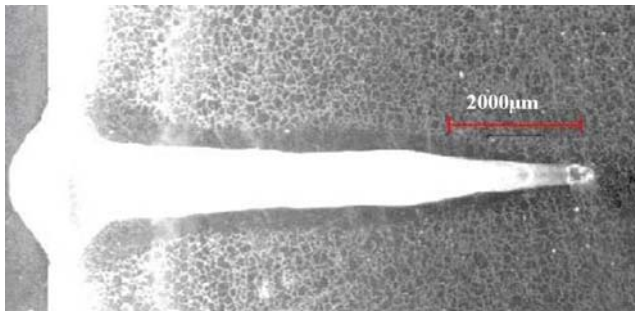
Typical nail head type of weld profile of 718 Plus welds
